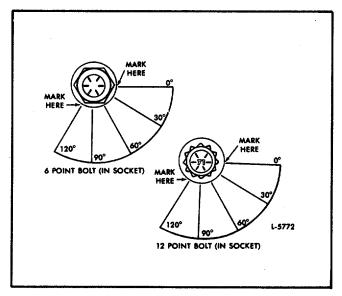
Main Bearing Cap Bolt Turn Torque Method
